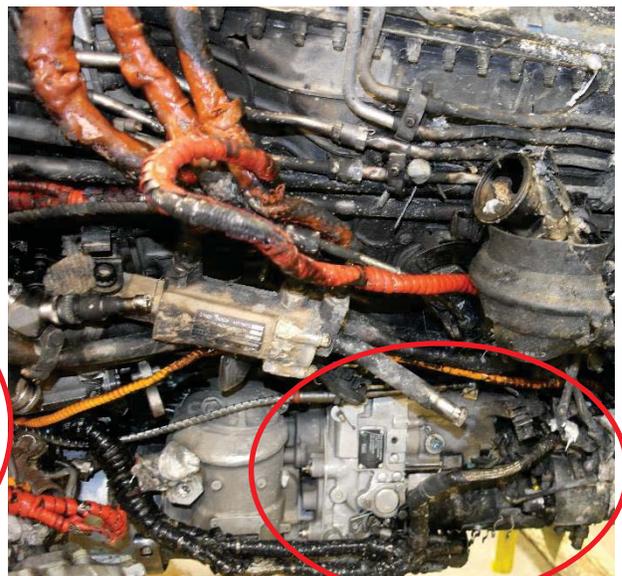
Main Fuel Pump/MEC Assembly (Tab J-9)
